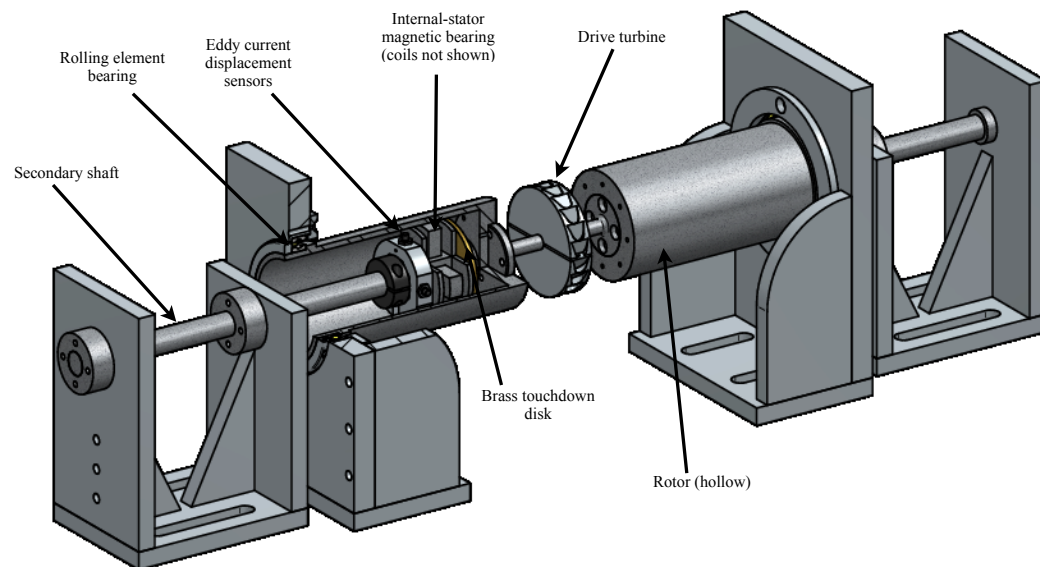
3D CAD view showing key structure of the overall assembly of the final rig, including cut-away to see secondary shaft and magnetic bearing details
